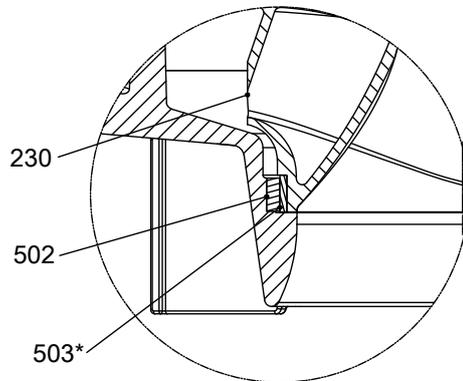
Version with casing wear ring and impeller wear ring (optional)
